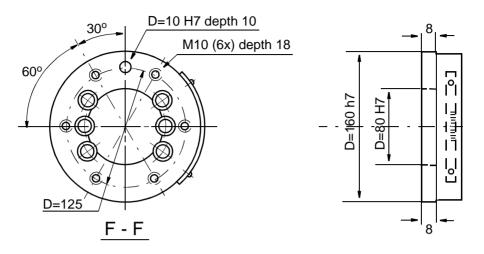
The mechanical interface (mounting flange) ISO 9409-1-A125 (dimensions in mm).
